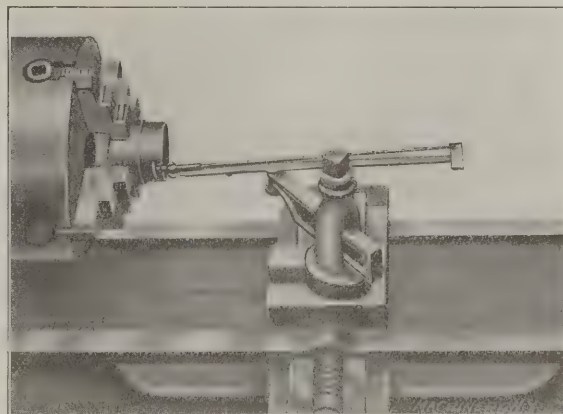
The Indicator in use Truing the Outer Surface of Work Held in a Chuck.
